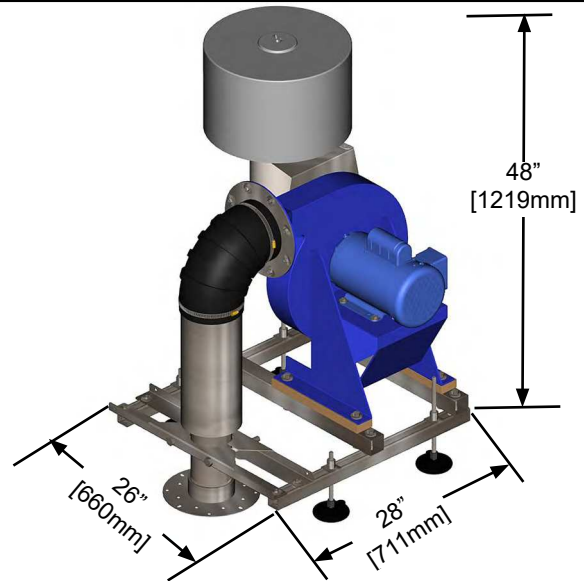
F4 Ventilation Blower (Steel roof mount configuration shown.)
